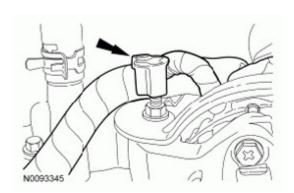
Locating Generator Wiring Harness Retainer On Generator Support Bracket Stud Bolt Courtesy of FORD MOTOR CO.
